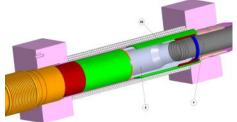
Schematic representation of the pressure tube crimping on the inside of end fitting
